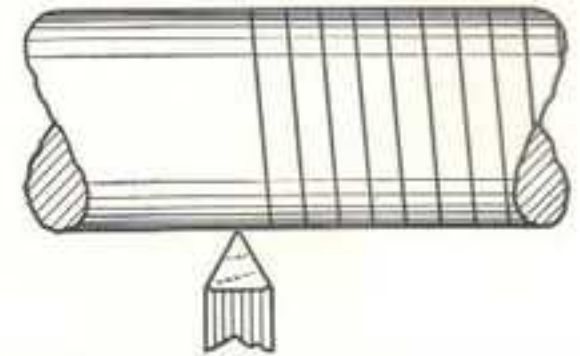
Trial Cut to Check the Set-up for Thread Cutting
